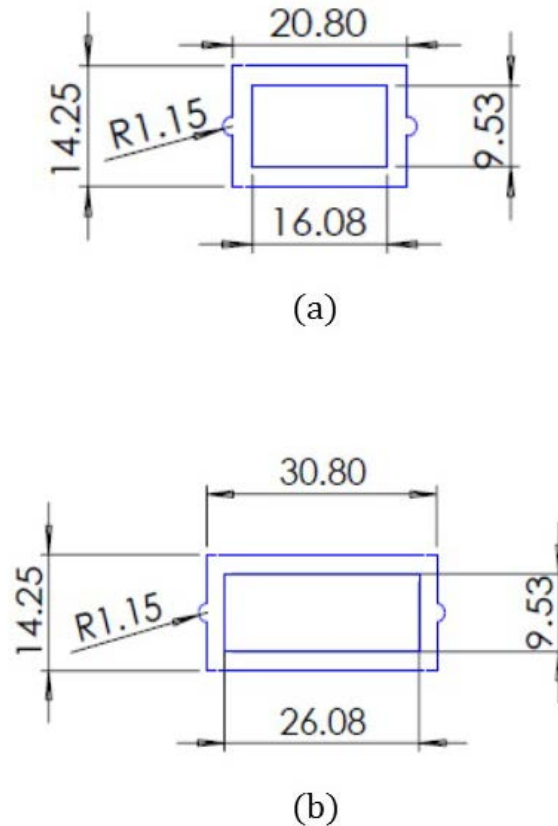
Mounting frame dimensions for a) 5-mm gage length sample and b) 15-mm gage length sample. All dimensions are given in millimeters.
